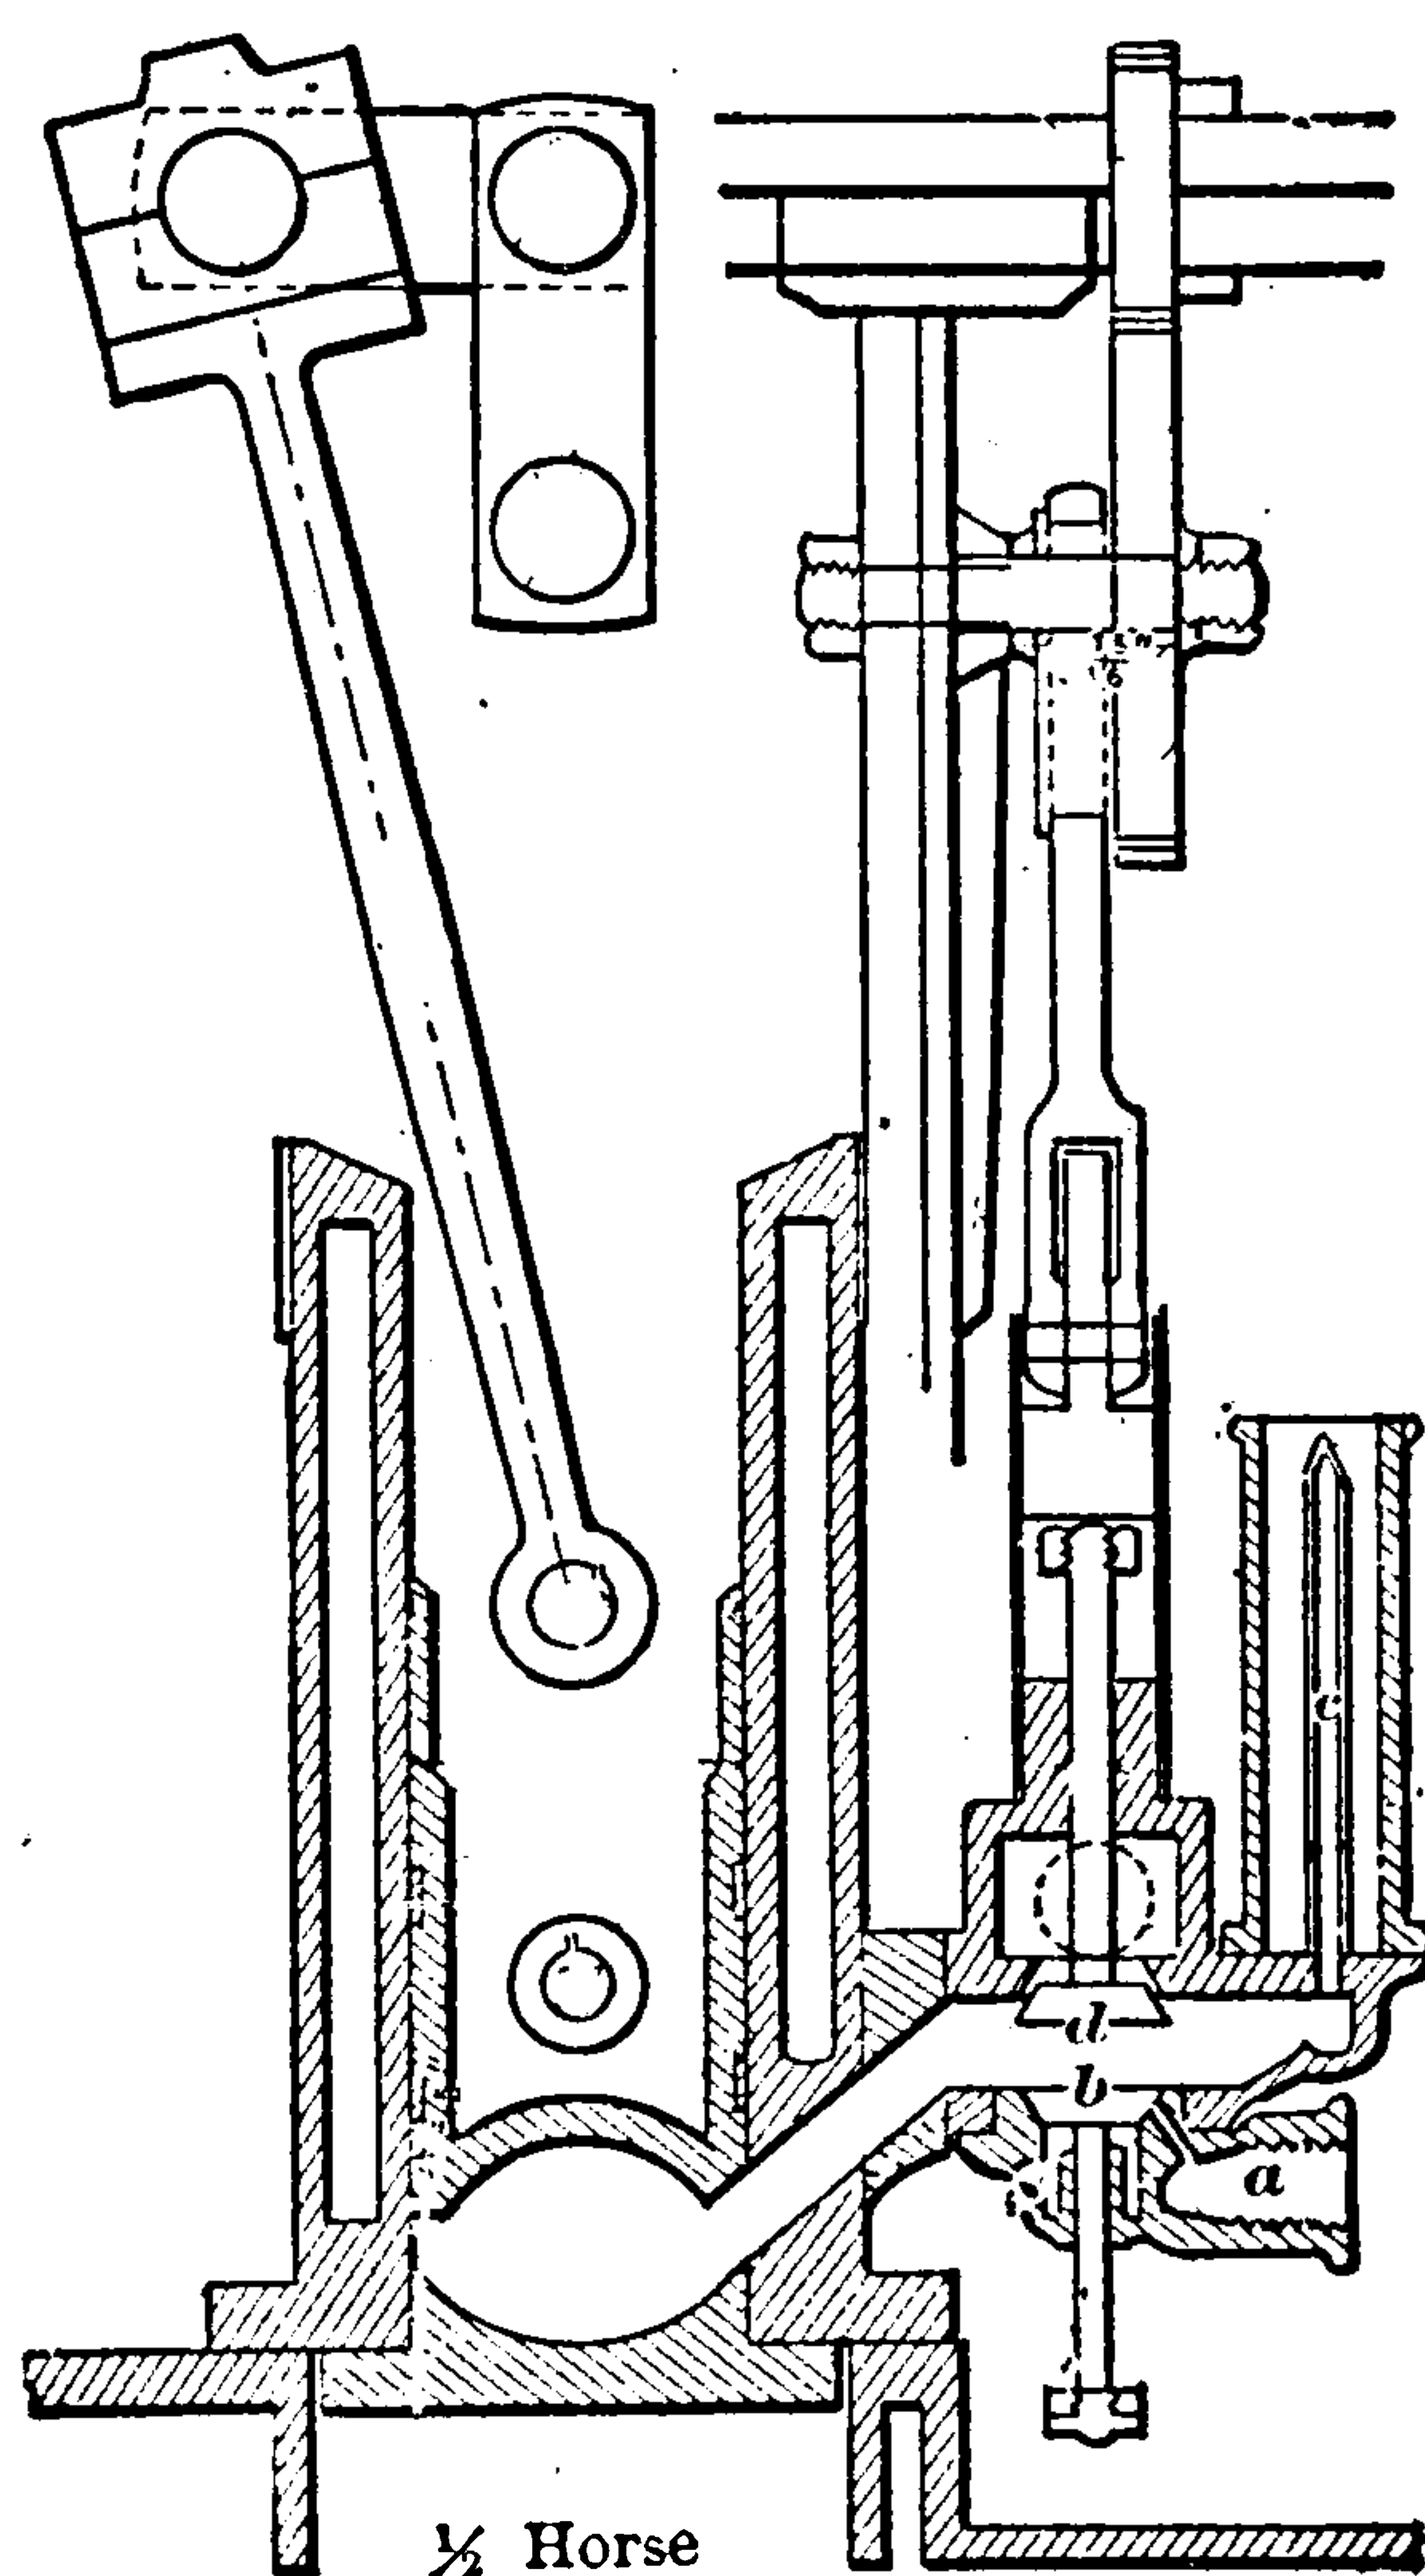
VERTICAL SECTION OF THE BACKUS GAS ENGINE.
